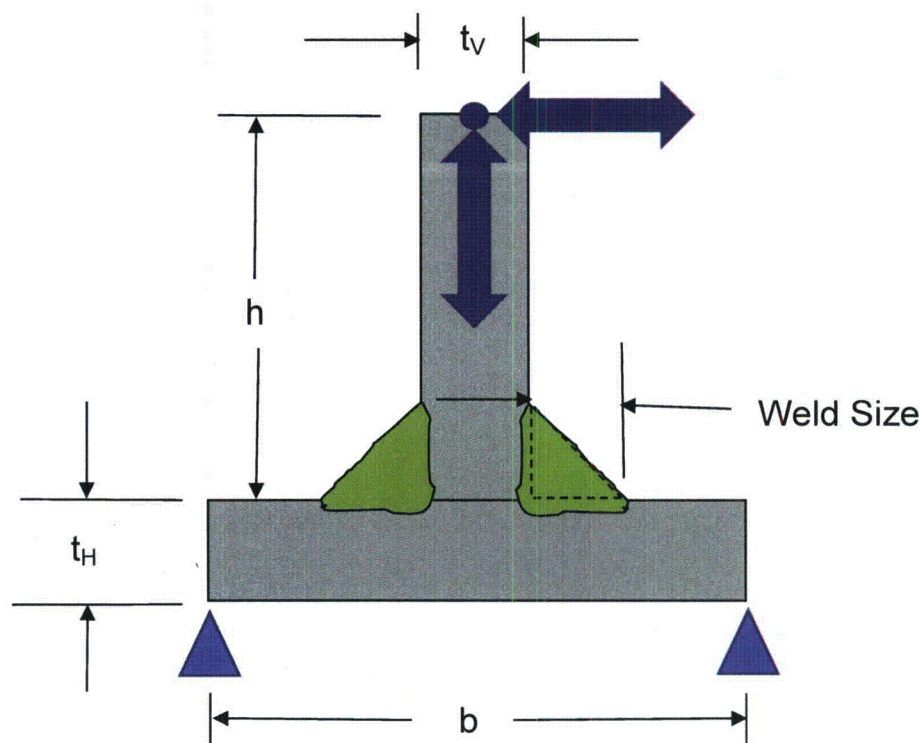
Double sided fillet welded T-joint with nomenclature for analyses
